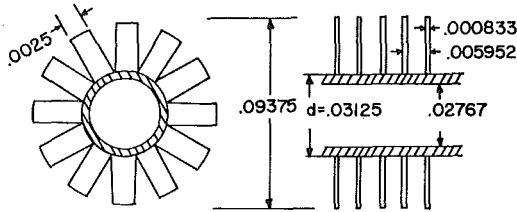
Sketch of assumed dimensions (in ft) of heat exchange element
